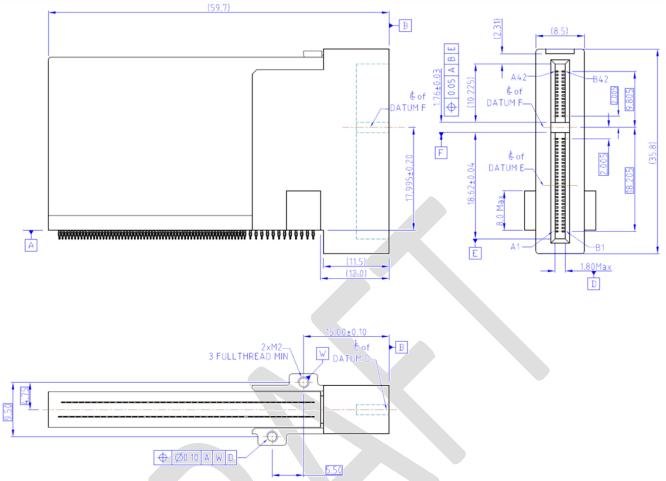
2C RIGHT ANGLE ORTHOGONAL CONNECTOR DIMENSIONS (MM)
